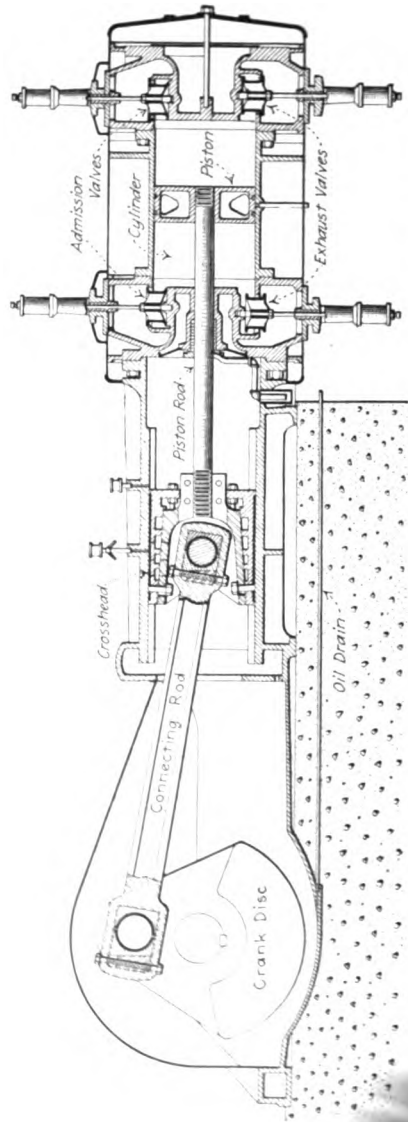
Longitudinal section of single-cylinder "Lentz" engine. (Eric City Iron Works.)
